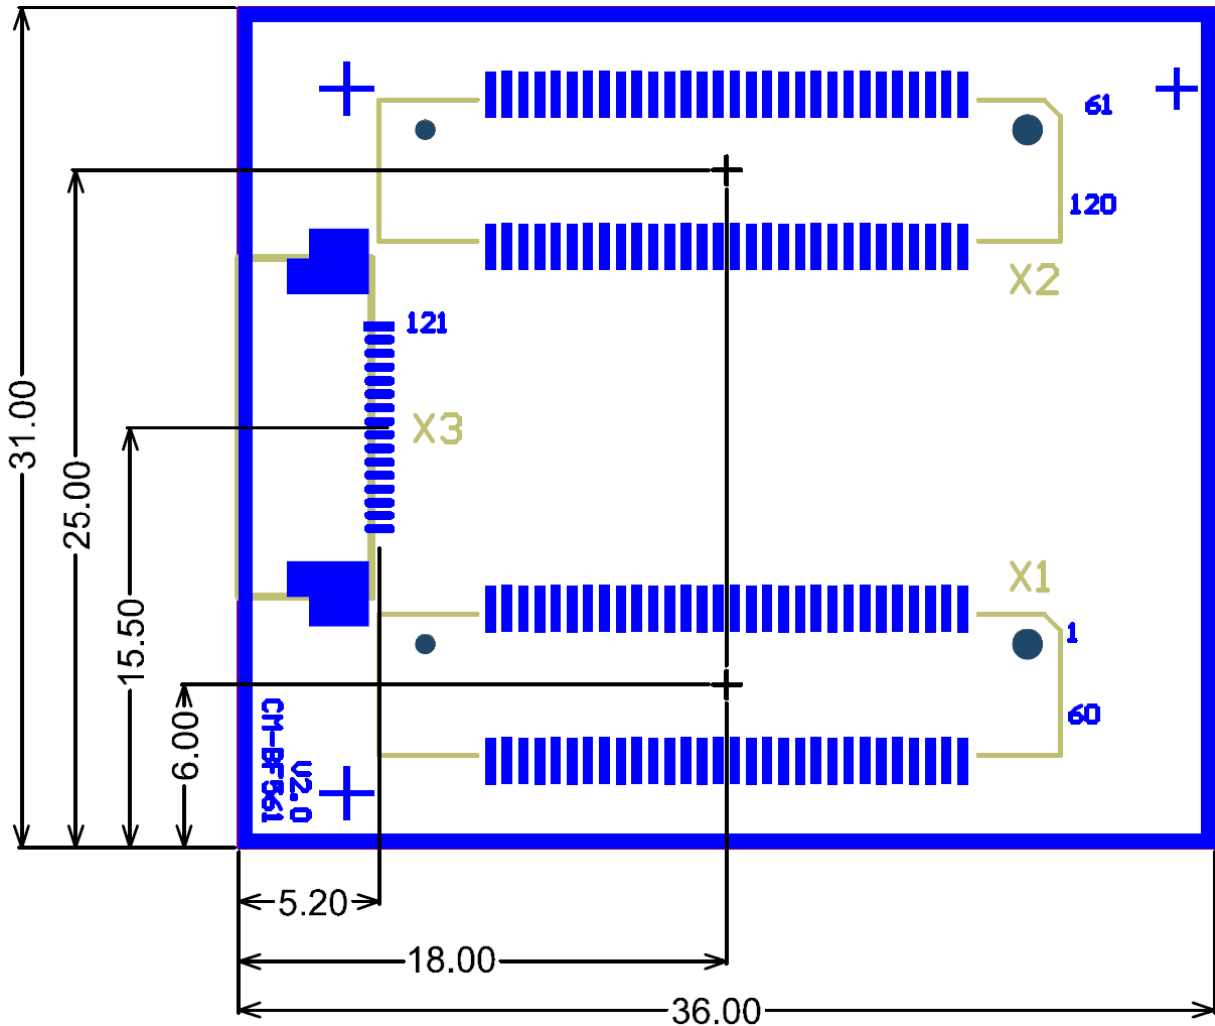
Mechanical outline and Bottom Connectors (bottom view)
